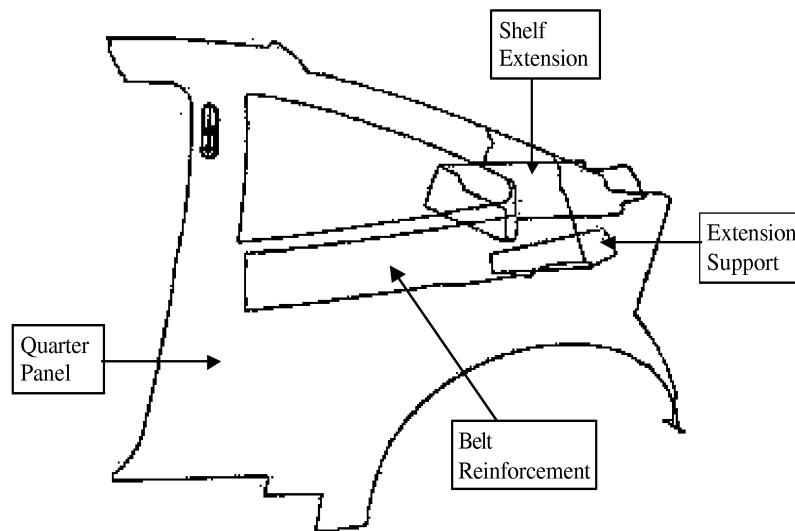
Stamped Component Panels in the Quarter Panel Assembly
